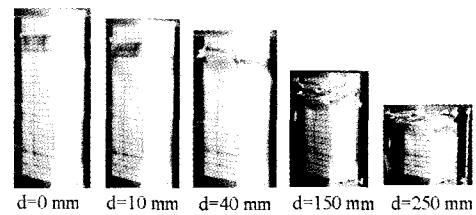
Typical collapse modes of aluminum extruded beams with 3 triangular cross sections
